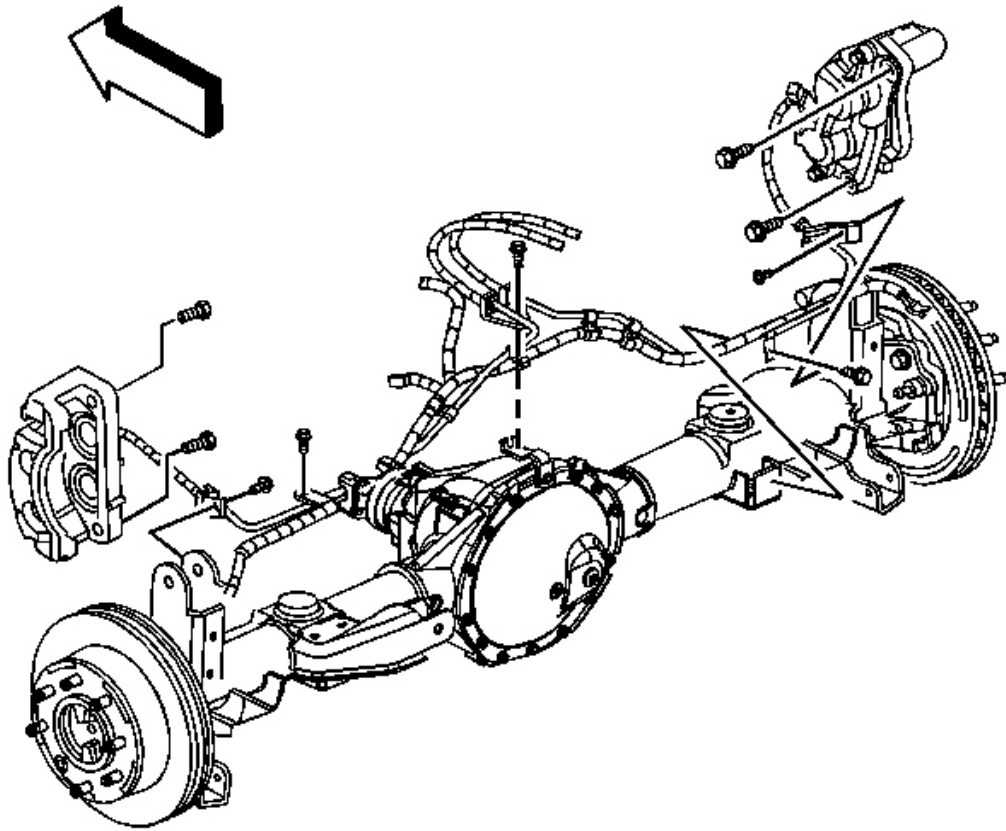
Brake Crossover Pipe, Wheel Speed Sensor Harness & Electronic Locker Harness
